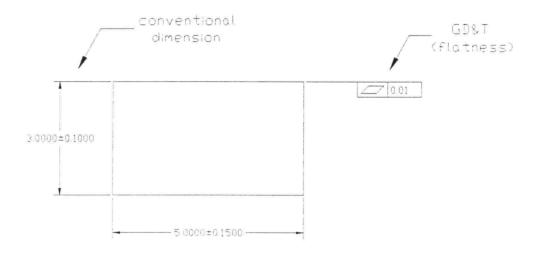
Part Drawing Including Both Conventional Dimension and GD&T (Flatness) Specification
